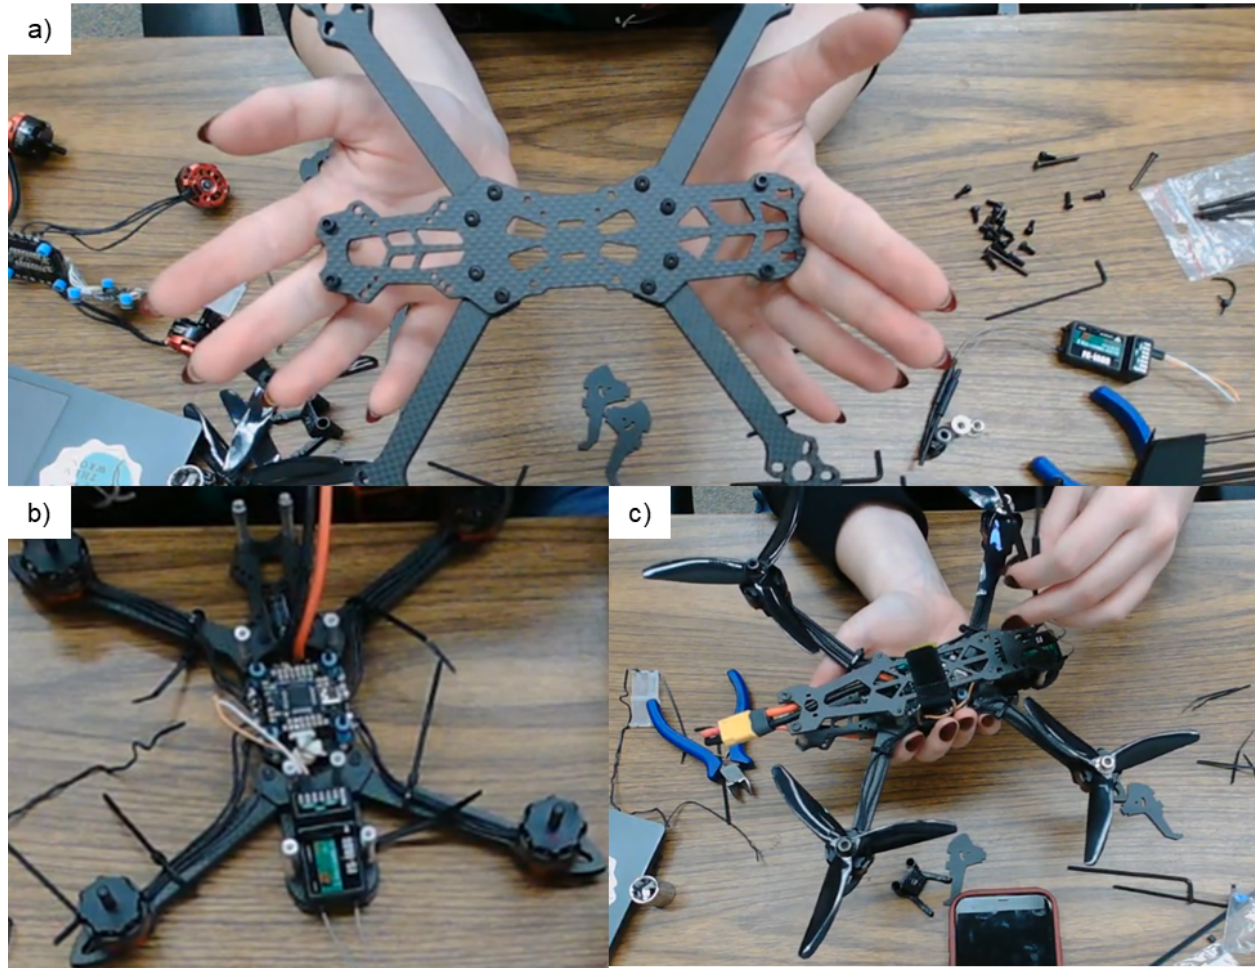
Assembly videos for (a) assembling base frame, (b) fastening electrical components, and (c) final assembly.
